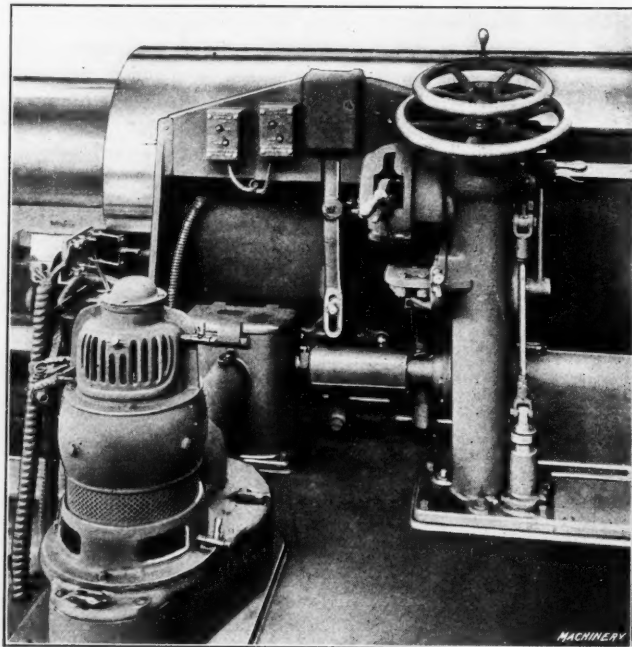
Detail of Control of Norton Roll Grinding Machine showing Wheels and Levers governing Hand and Power Feed
